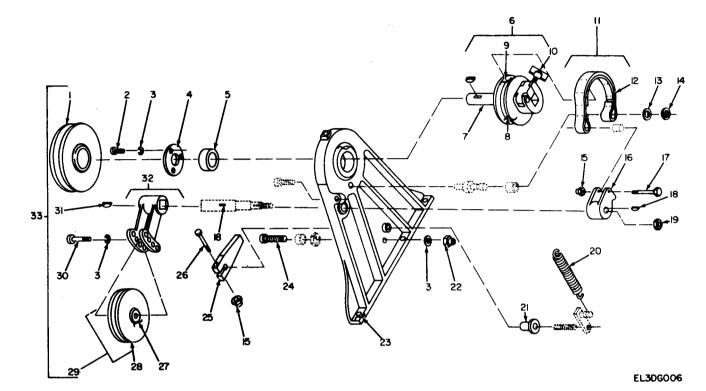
Reeling Machines, Cable, Motor Driven RL-172/G and RL-172A/G, Reel Shaft Support (Belt Side), Exploded View.
